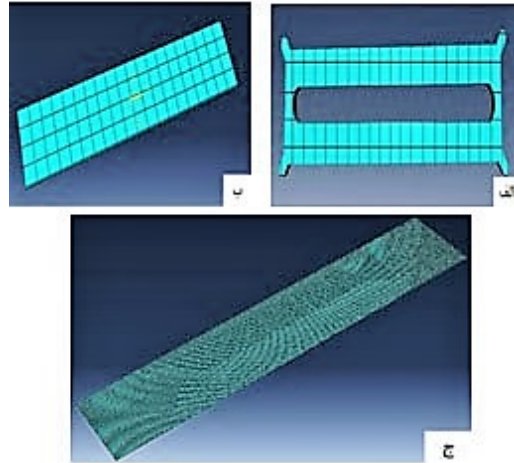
Geometry of related parts: (a) clamping plate, (b) bottom plate, (c) aluminum sheet.
